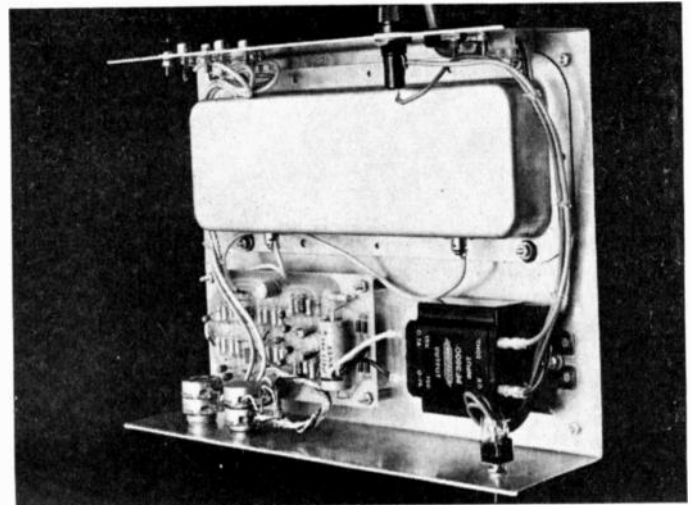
Method of mounting the hardware and printed circuit board into the chassis is illustrated in this internal view.
